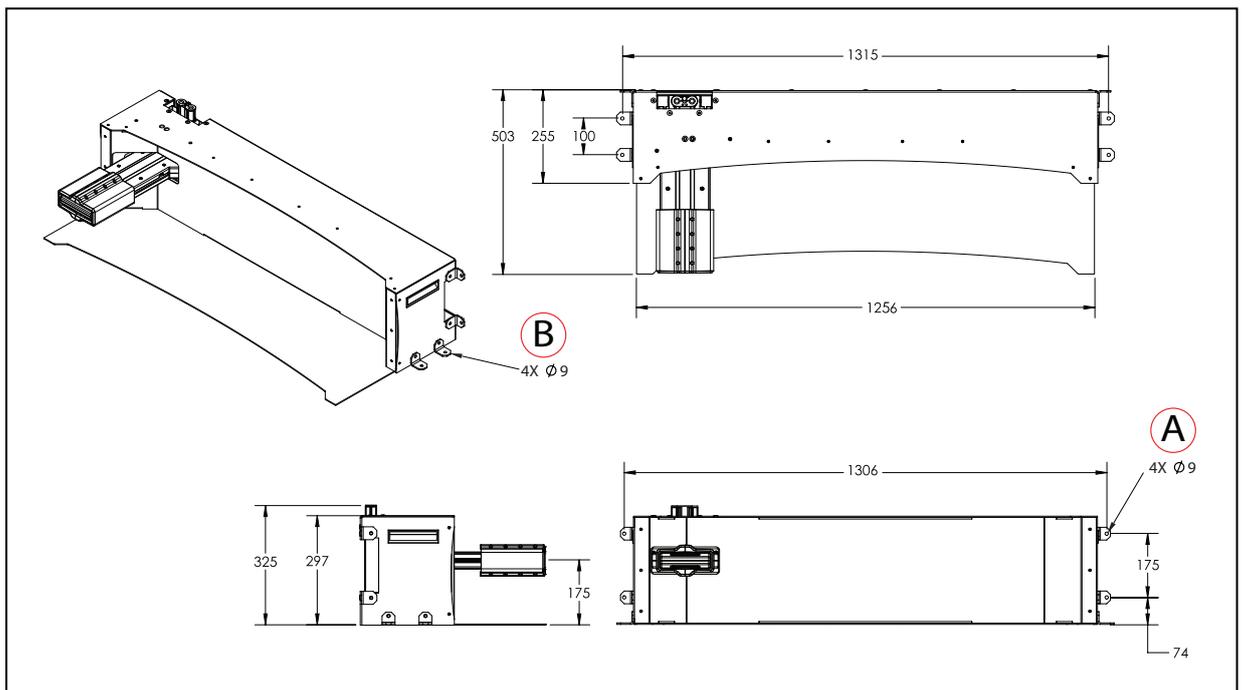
Docking Target Dimensions, (A) Wall Mount Brackets, and (B) Floor Mount Brackets (units are in mm)
